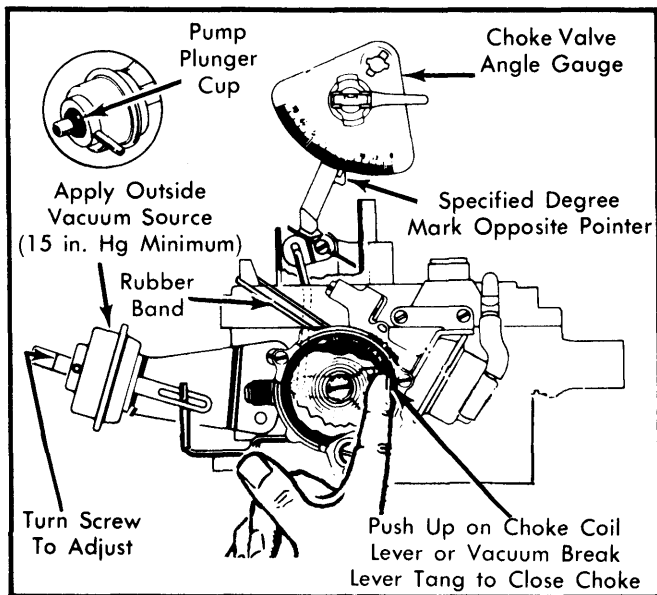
Adjusting Secondary (Rear) Vacuum Break
